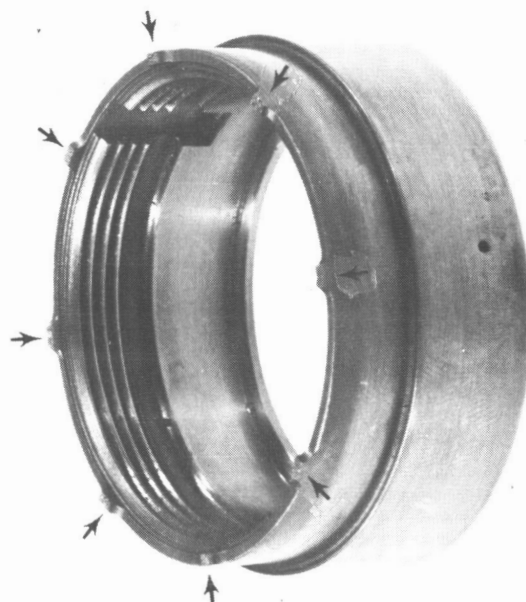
Front Bearing Mount Spring Showing Failure of Eight Axial Beams
